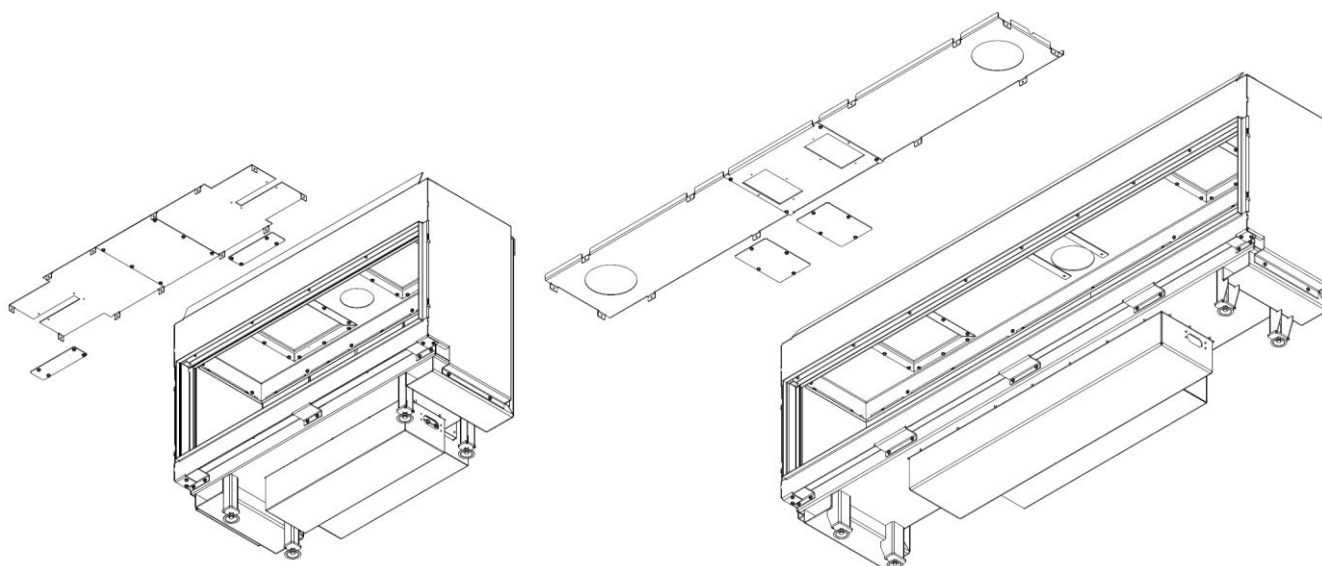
Disassembly of LEO100 and LEO200 deflectors
